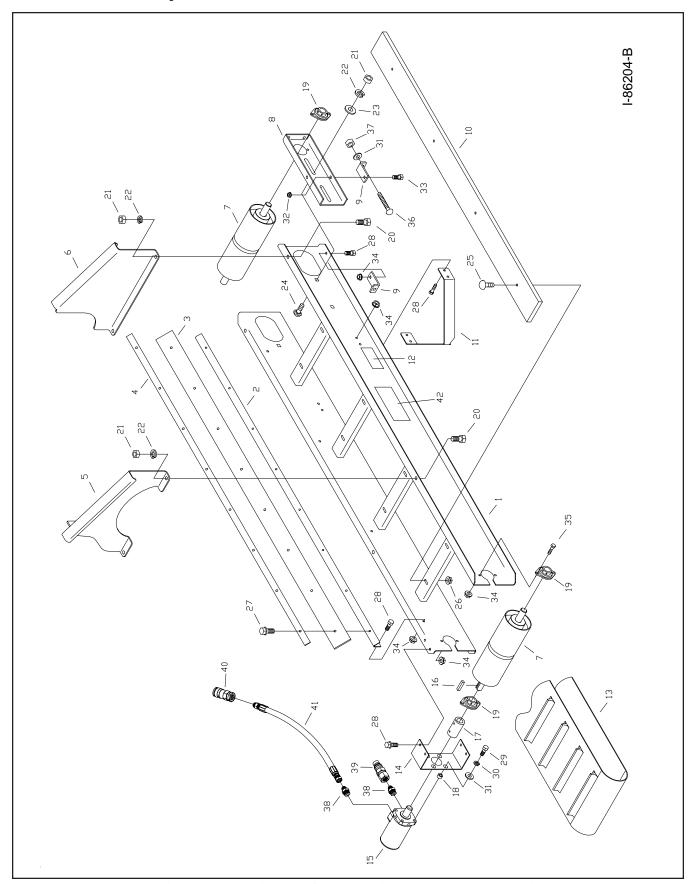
Horizontal Conveyor Attachment Parts Detail
